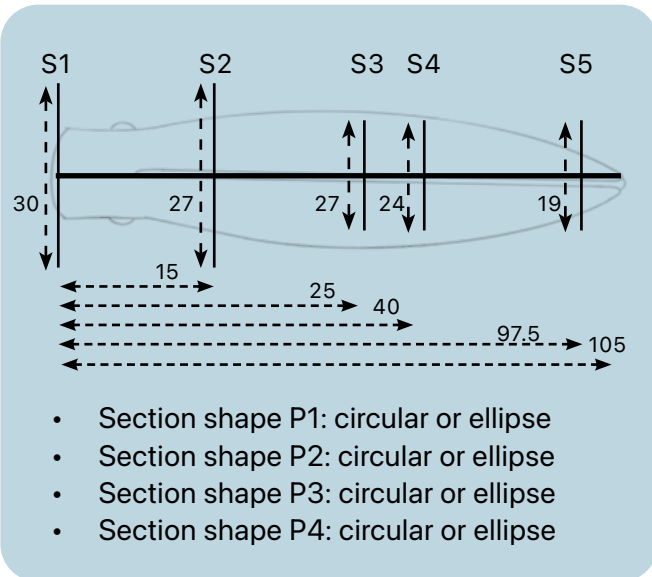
Scheme of the sections, dimensions (mm) and variables used
